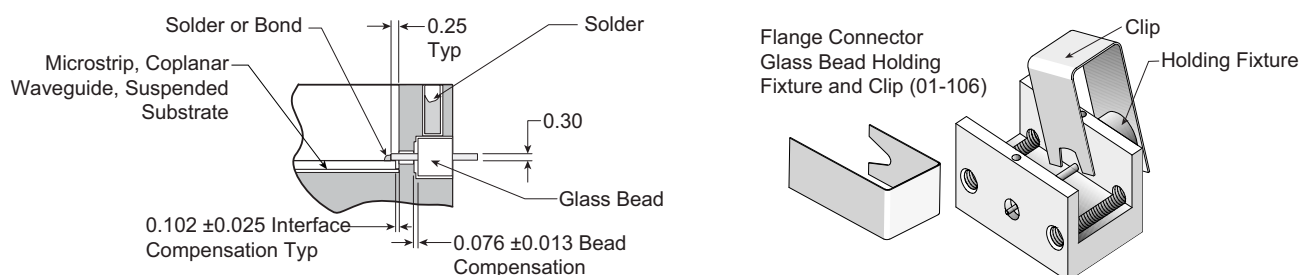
K104M-R or EK104M-R Glass Bead Assembly
